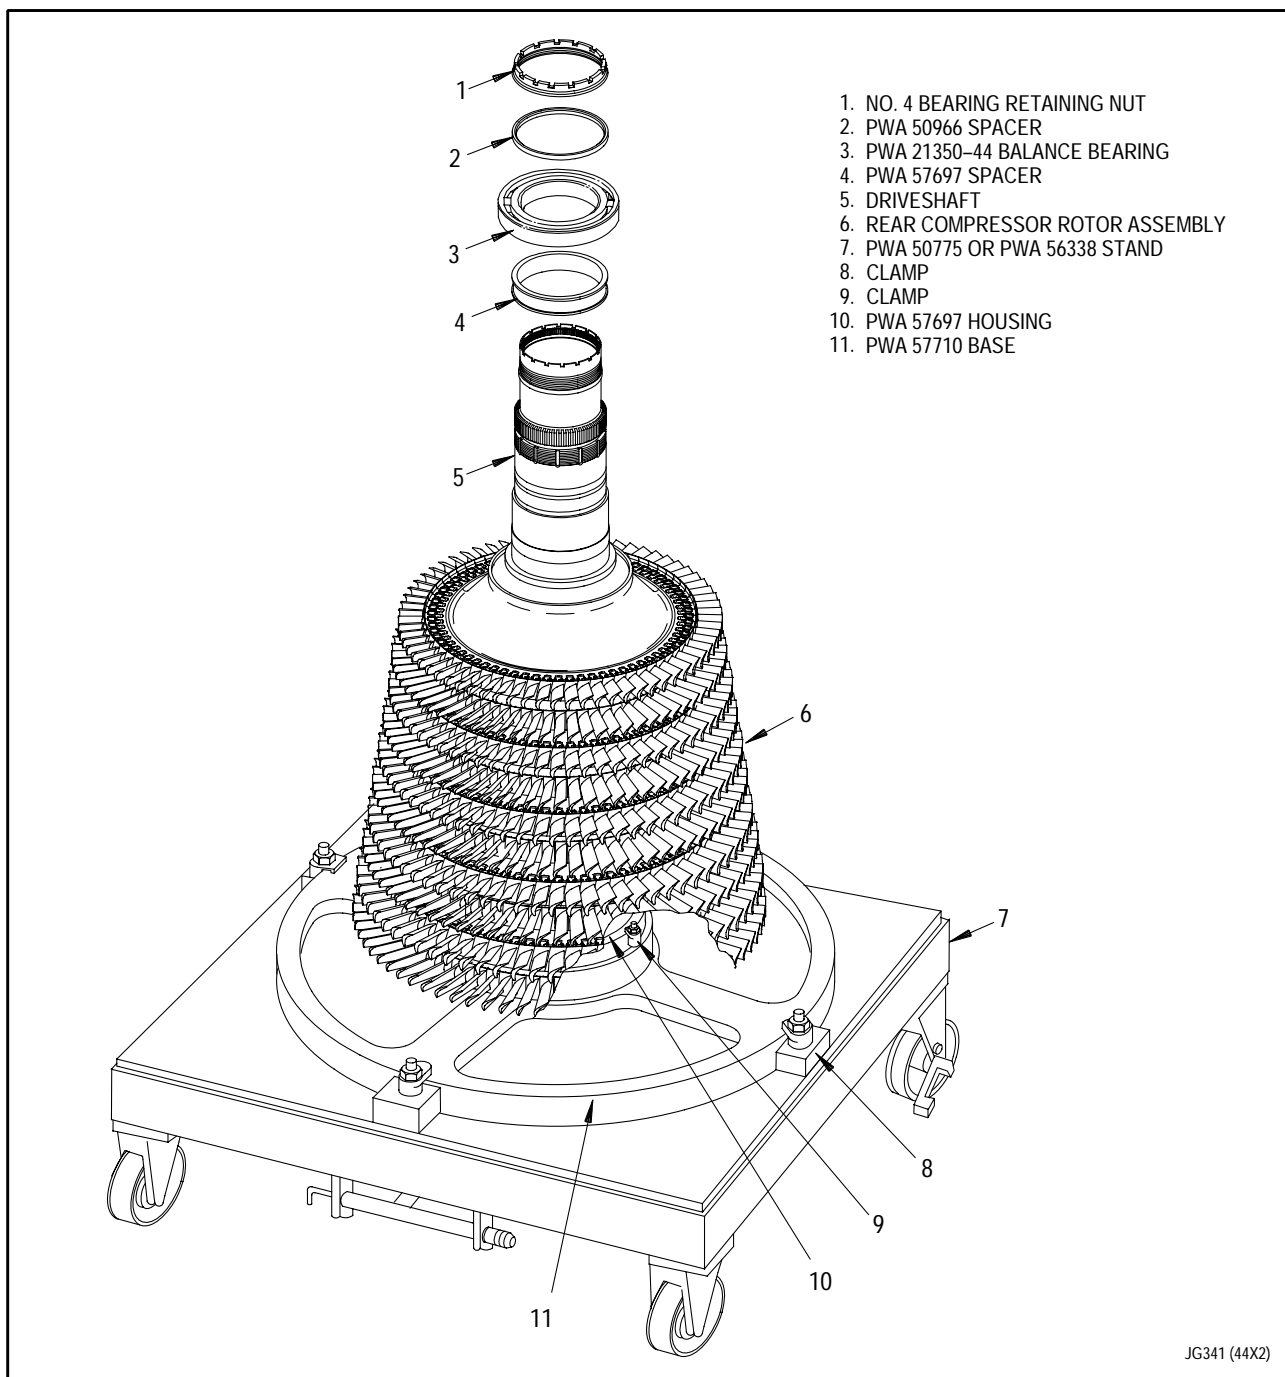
Rear Compressor Rotor Assembly Driveshaft Balance Bearing - Installation
